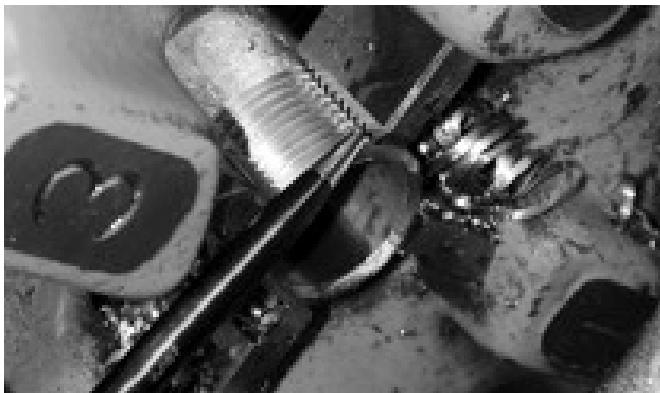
When proper thread length is achieved, the end of the conduit becomes flush with the ends of the die segments.
